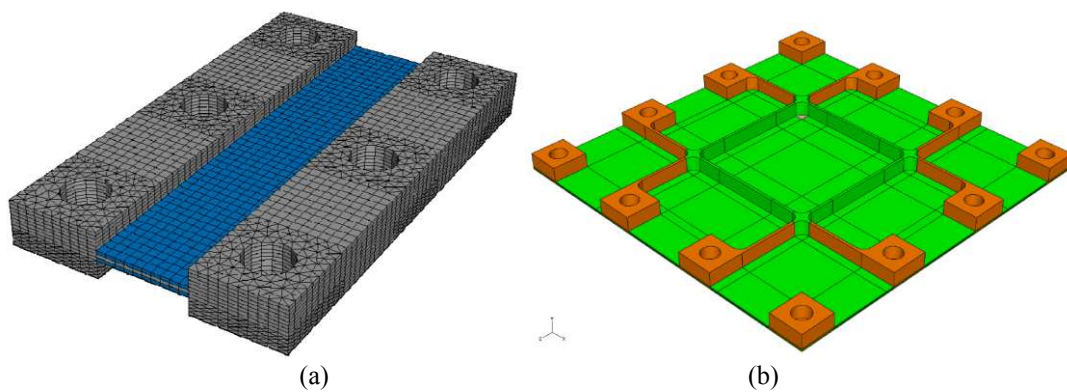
Geometry of two machined specimens: (a) a single channel specimen machined from both sides and (b) a nine-pocket specimen
